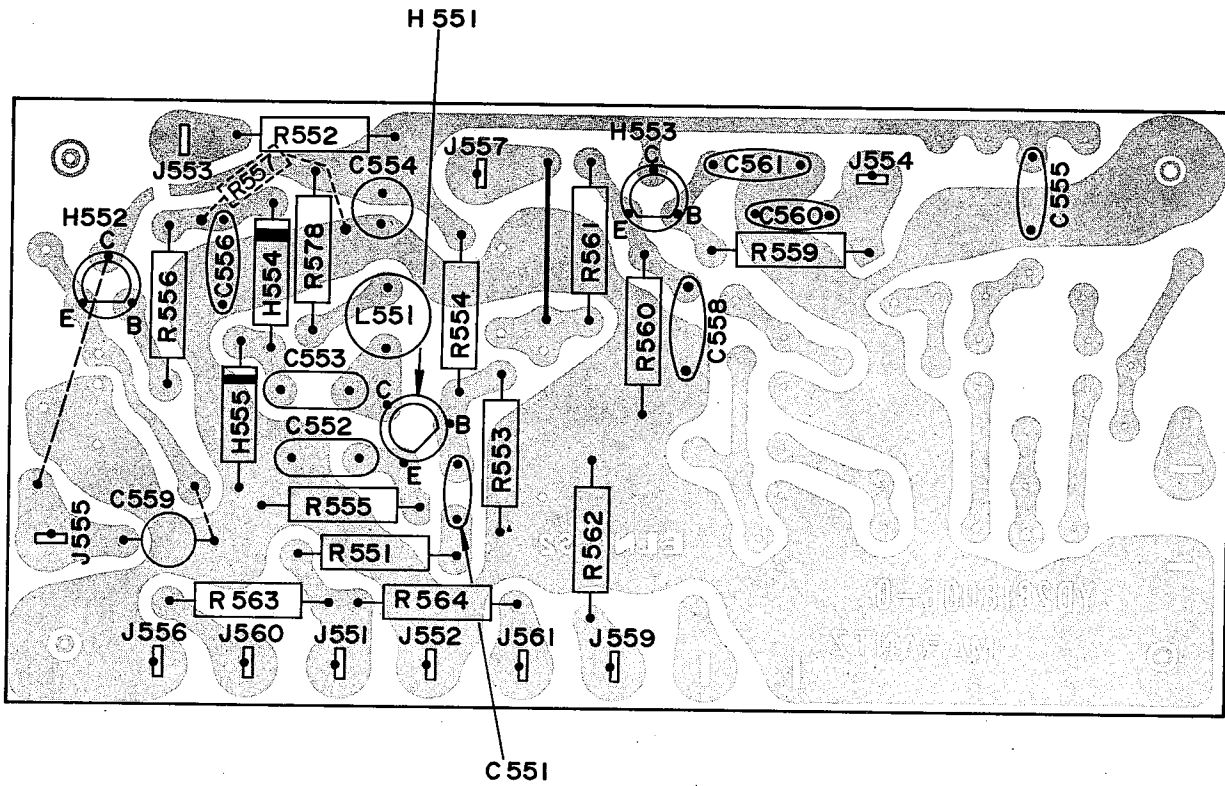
Muting Control Amplifier Assembly P550 Component Locations
